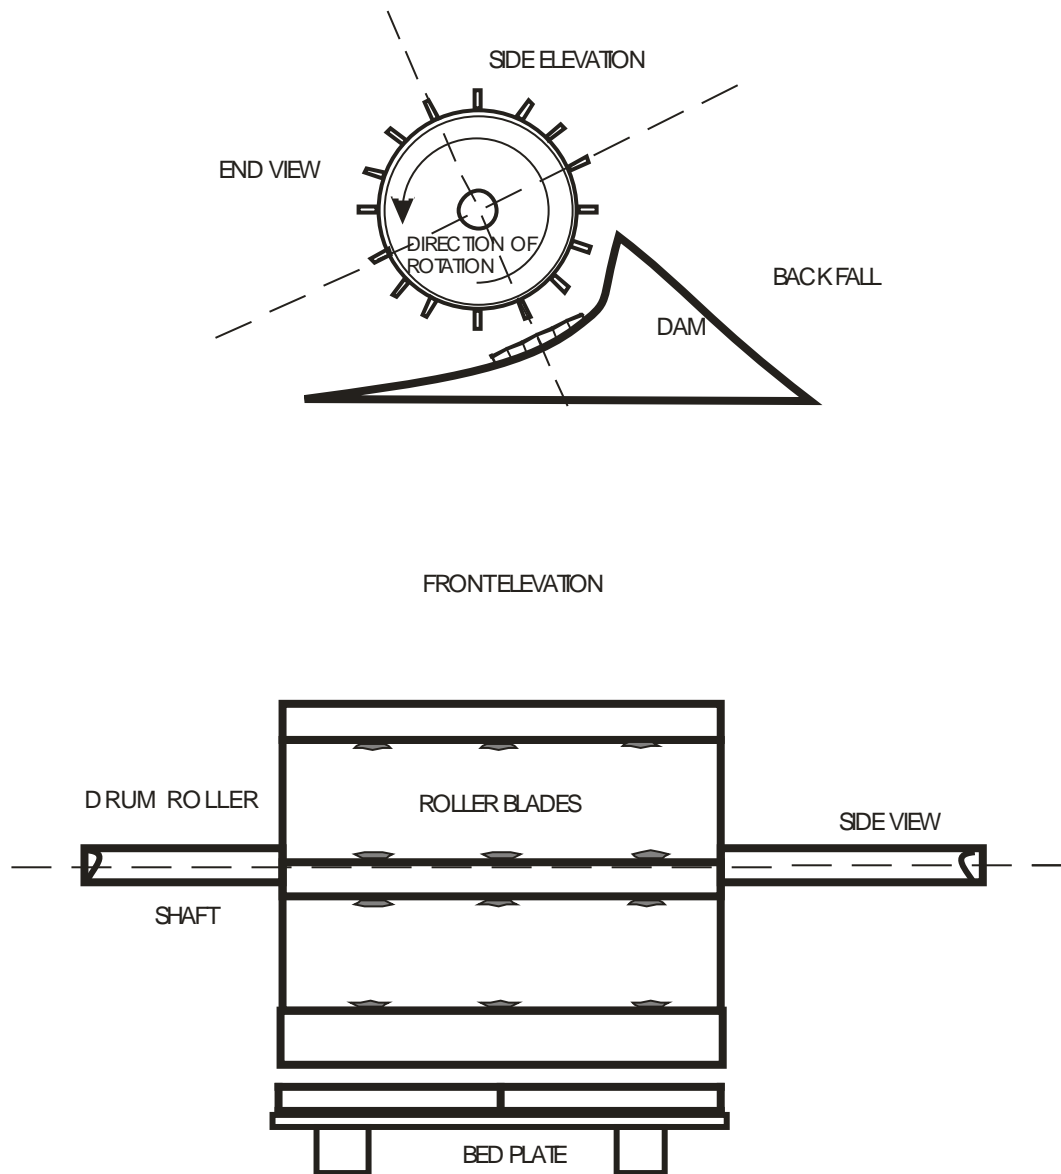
Diagram of Ada Beater showing a fixed bedplate design component and a movable Drum roller
